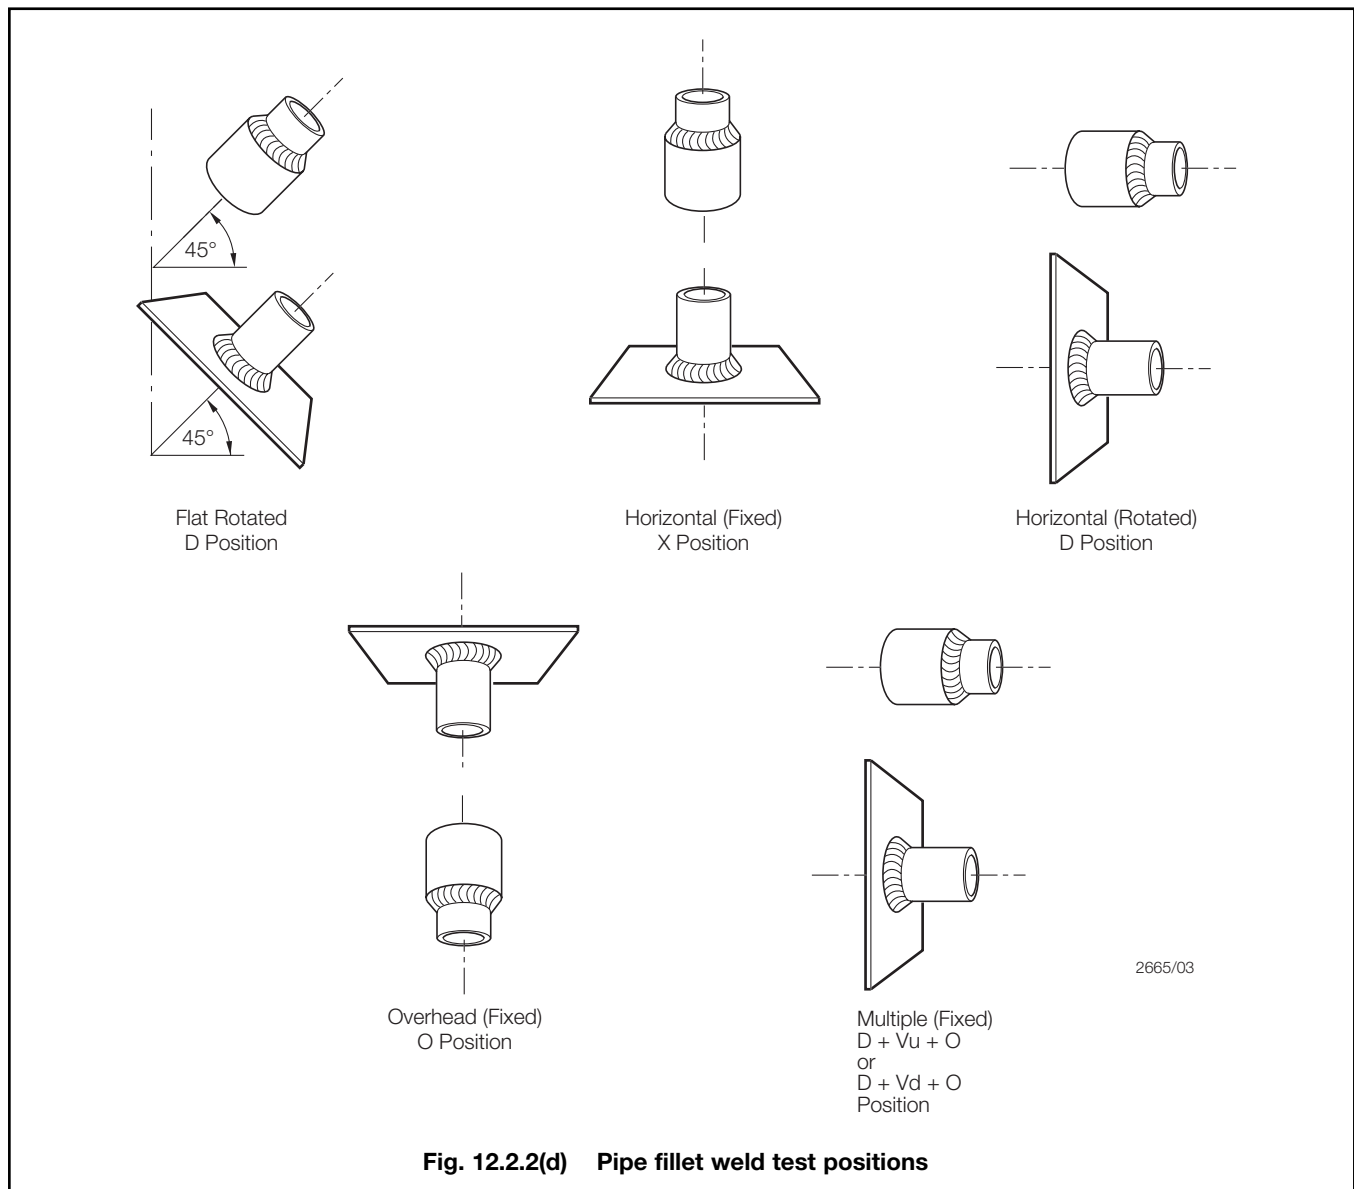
(d) Pipe fillet weld test positions
